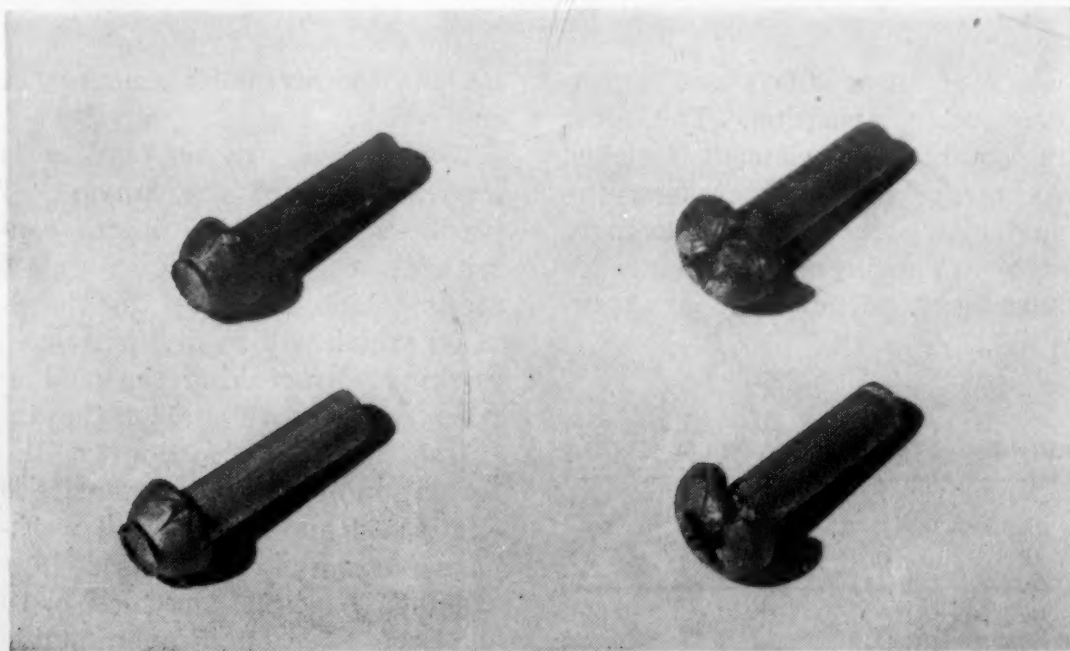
Split heads caused by excessive seams in wire. Left—first stage. Right—finished head. Top parts still coated; bottom parts have had coating stripped.
